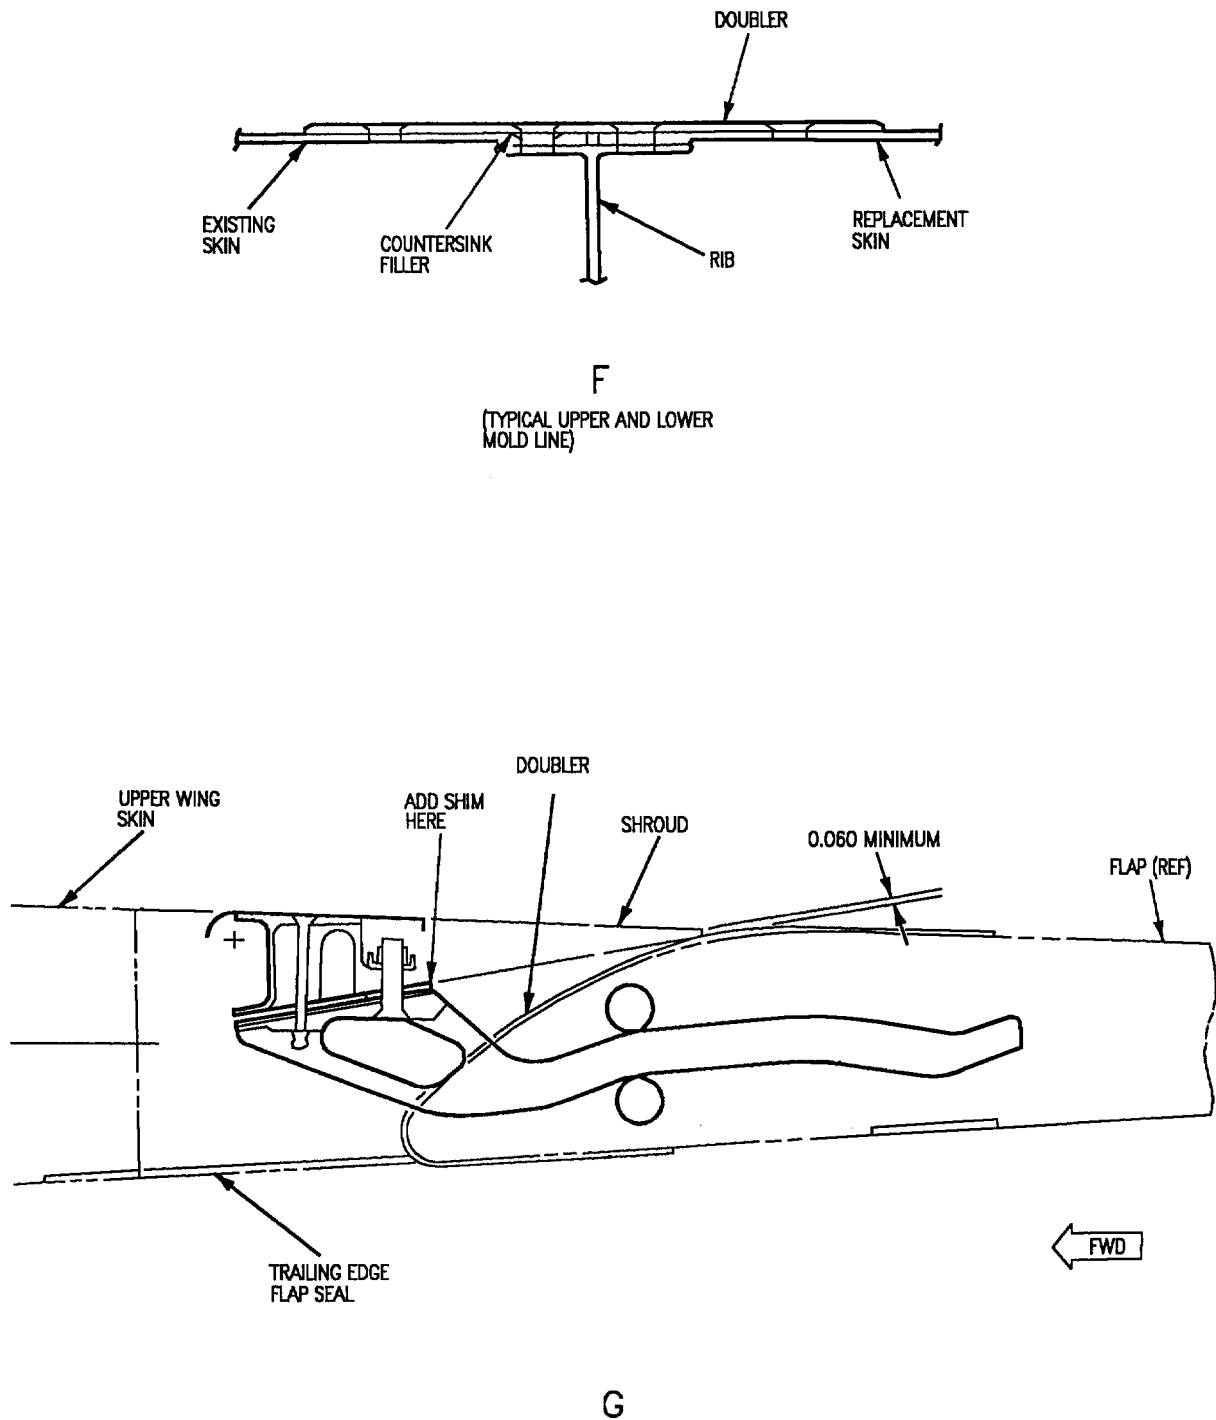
Outboard Edge Damage Repair (Sheet 4)
